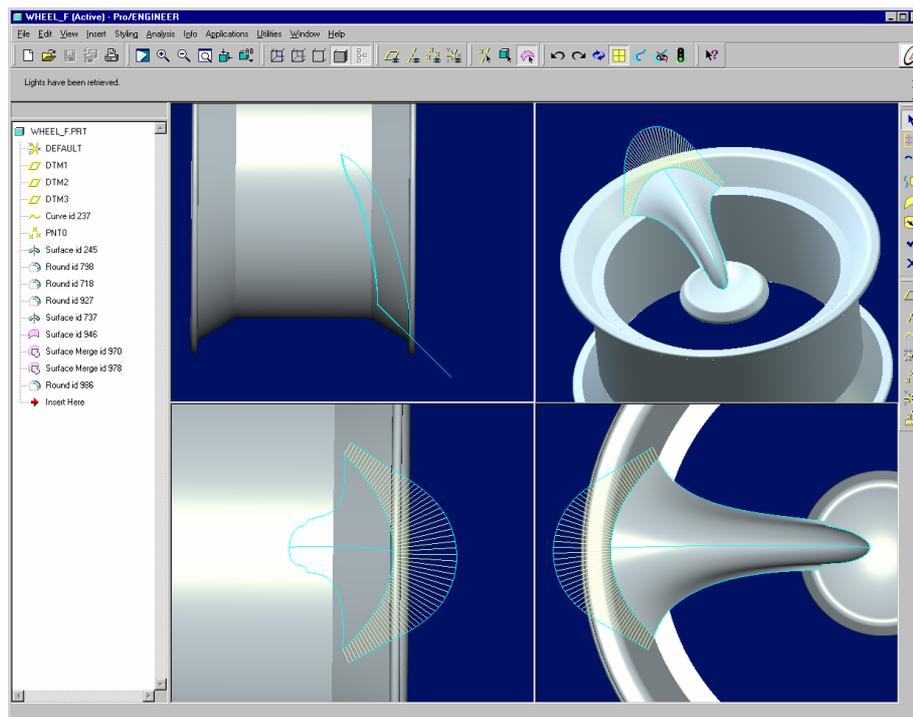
, An example of a wheel constructed in Pro/Engineer using surfaces of revolution, lathe process and surface trimming.
